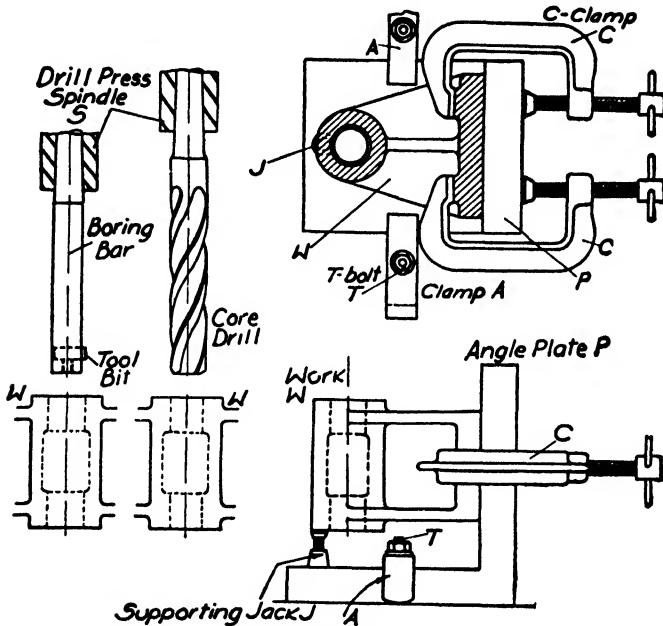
Core Drilling and Boring the Bearing Hole in a Bracket or Frame.
